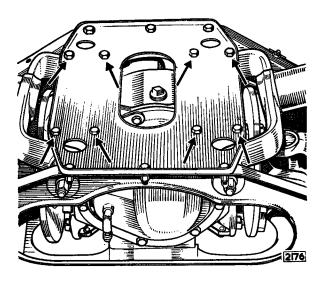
Showing the eight bolts which secure the tie plate to the inner fulcrum mounting bracket.
